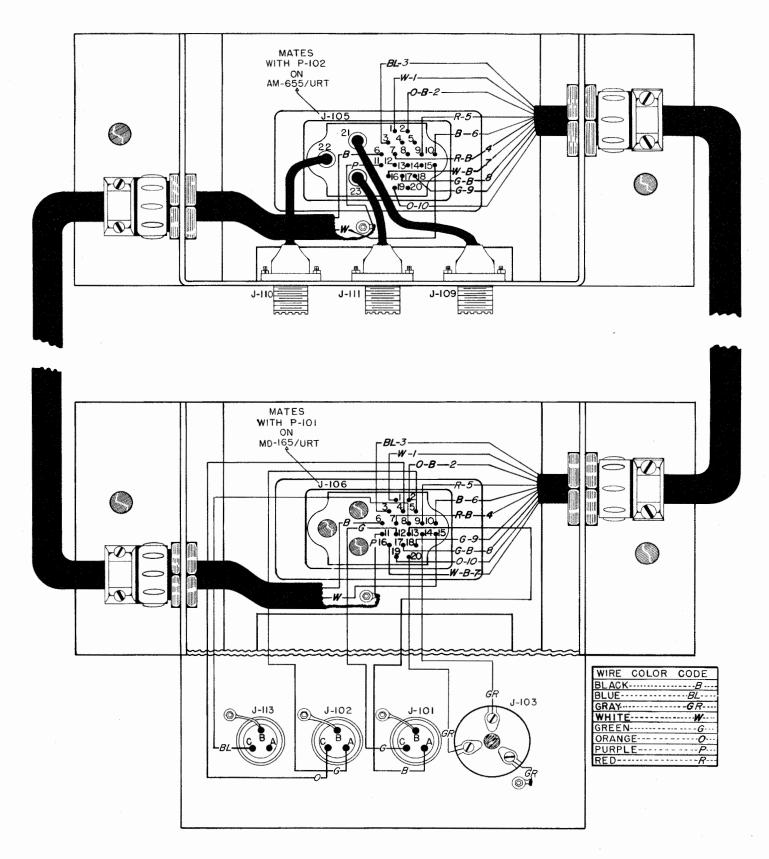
Practical Wiring Diagram of Blister Assembly, KY-58/GRT and KY-75/SRT Keyers
